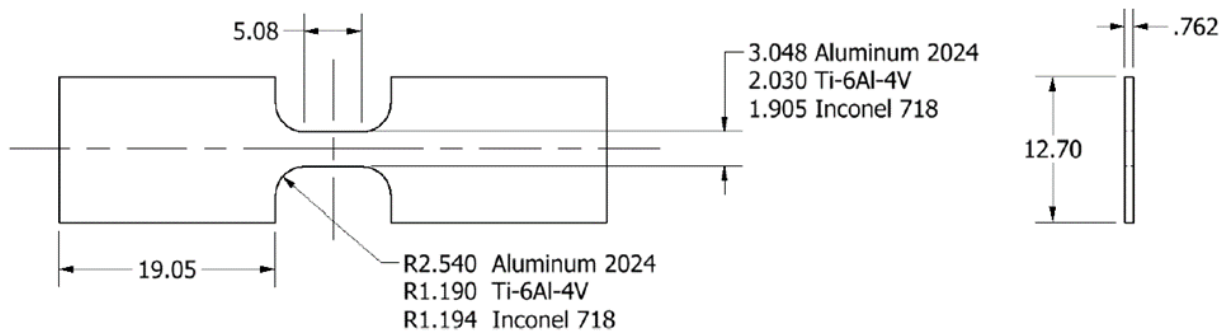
Geometry and dimensions of tensile test specimens of three materials (unit: mm)
